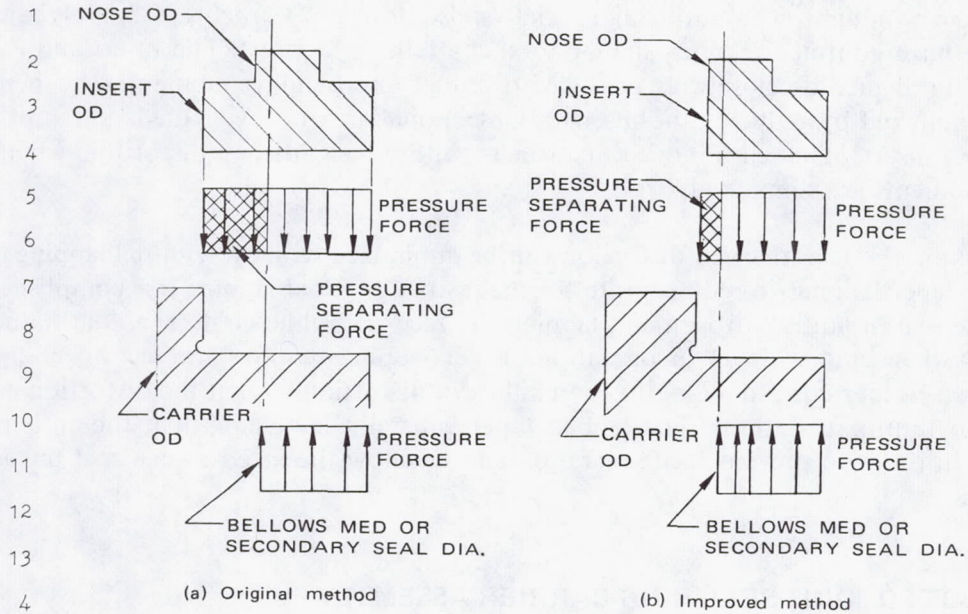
Method for reducing pressure separating force between seal insert and carrier for seals with higher pressure at the inside diameter.
